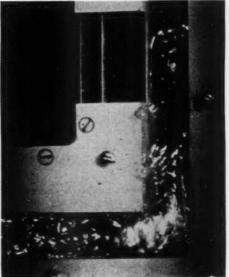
(Left)—Photo of a water casting being made by employing a poor pouring technique and gating design. A large volume of air formed in the vortex of the sprue is being discharged at base of sprue where it runs down the runner and into the mold cavity. These air bubbles qualitatively, but not quantitatively, represent damaged liquid or dross in light-alloy castings.
